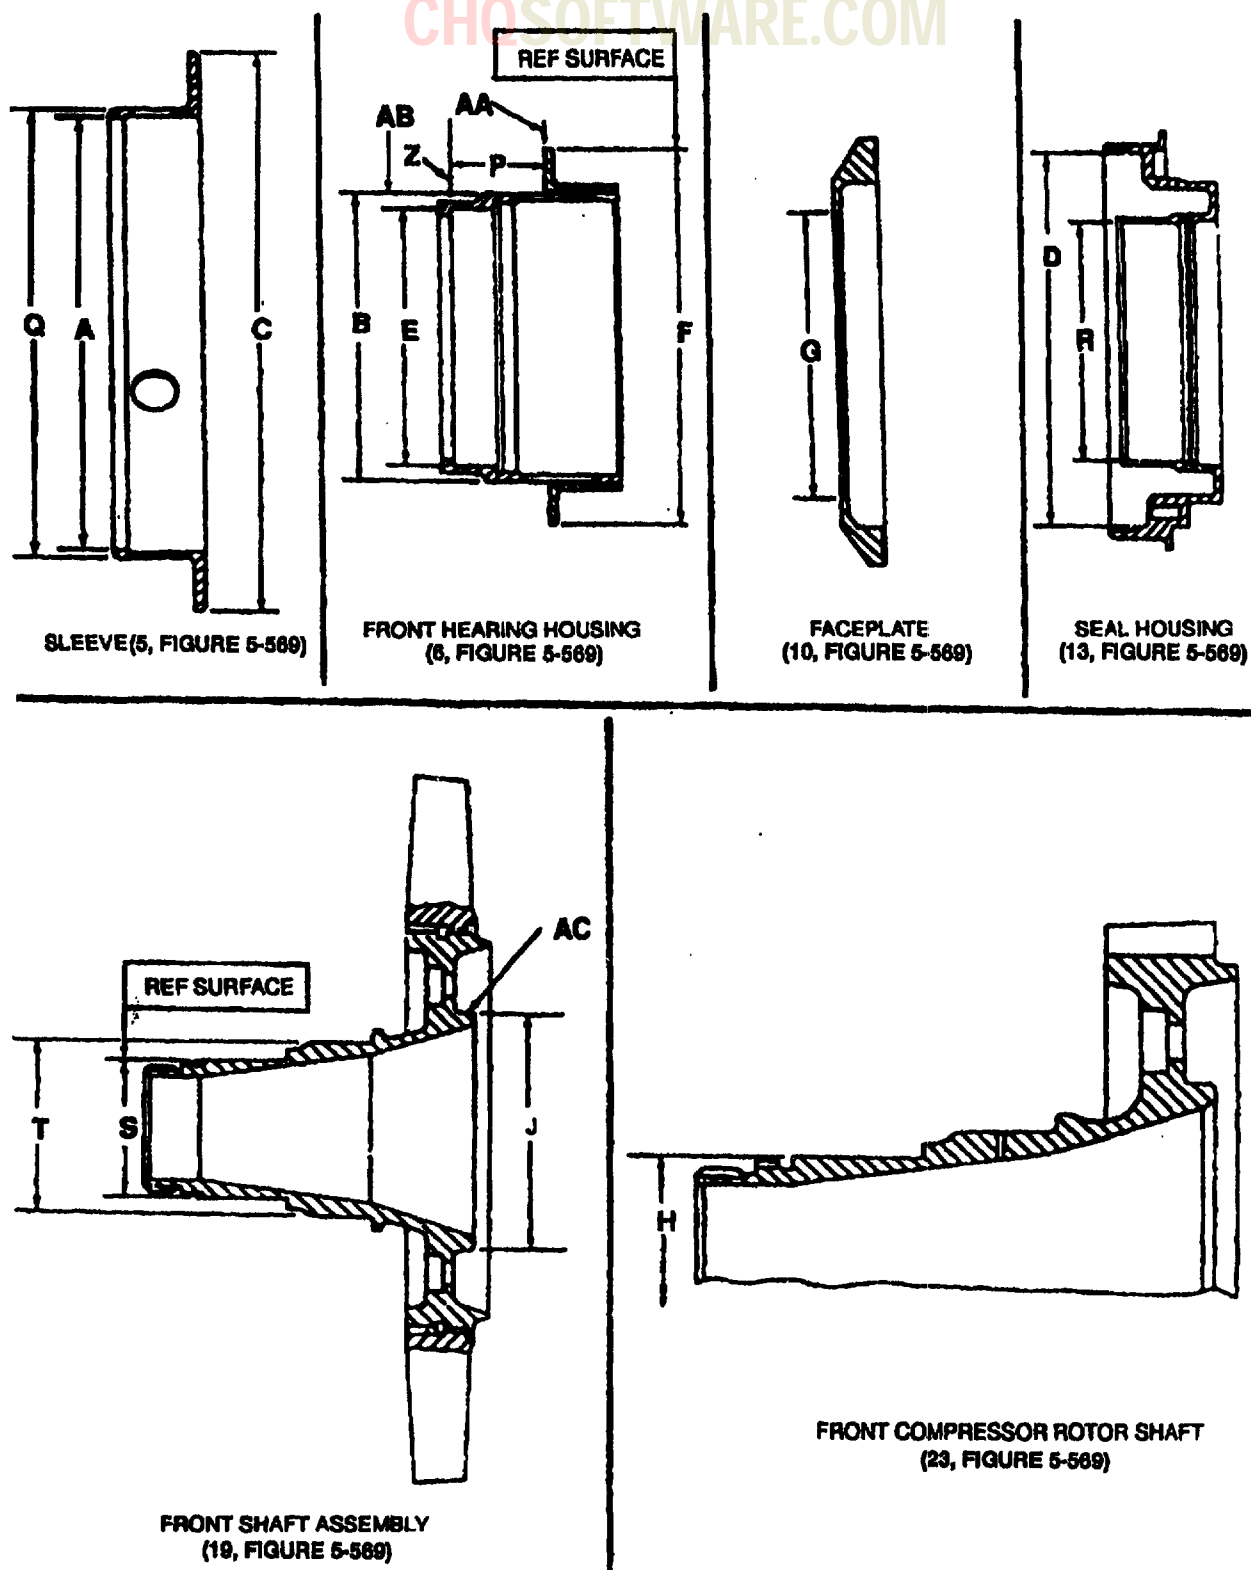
Compressor Rotor Assembly Dimensional Inspection Locations (T53-L-13B, -701A, -703)
